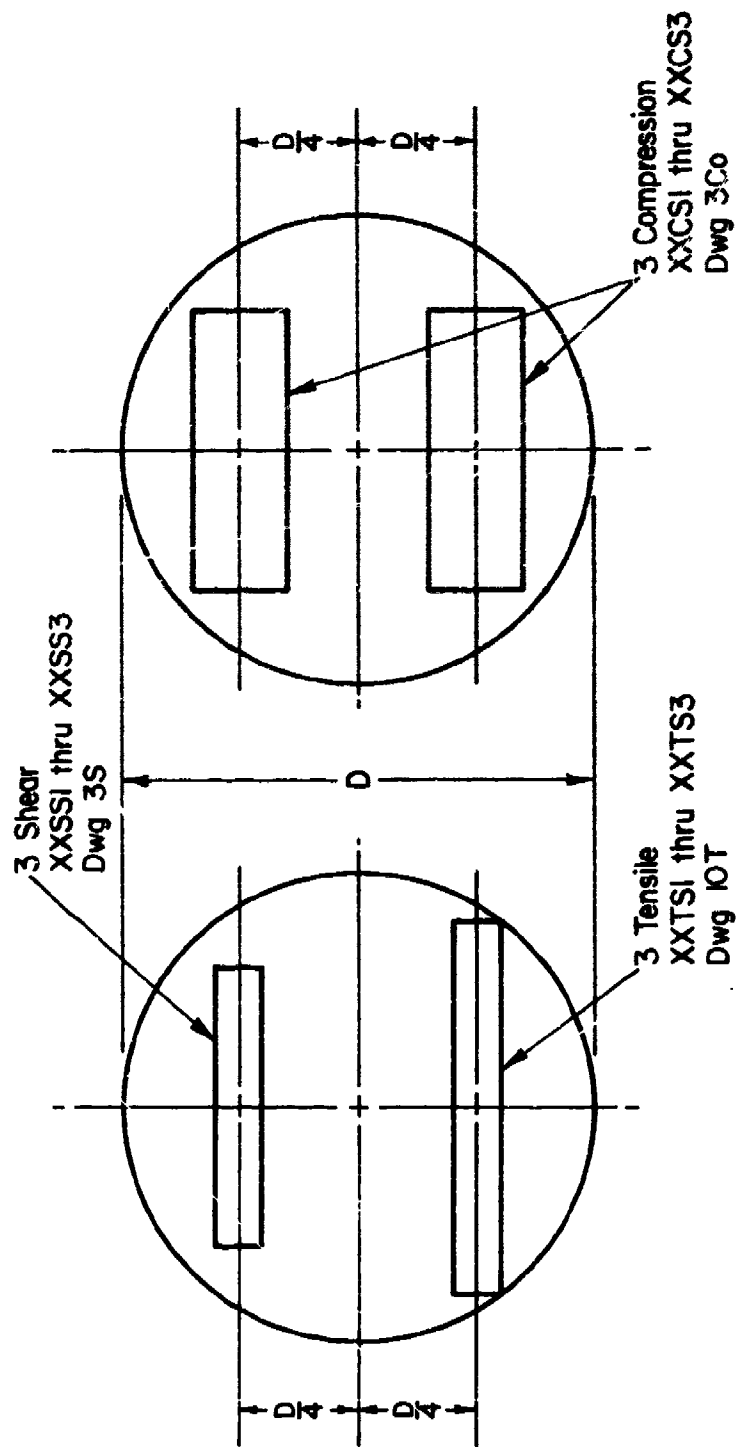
Location of short transverse tensile, compression, and shear specimens for Incone1 625 and Incone1 718 bar--2-1/2-, 2-3/4-, and 3-inch diameter.
